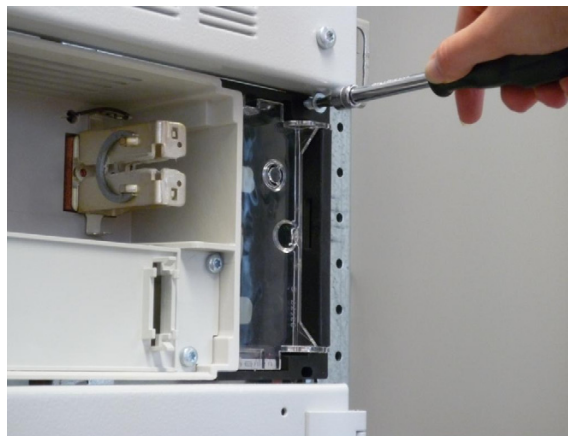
/ Figura 22: Fastening the plugged-on strip right / Fissaggio del sezionatore sul lato destro
